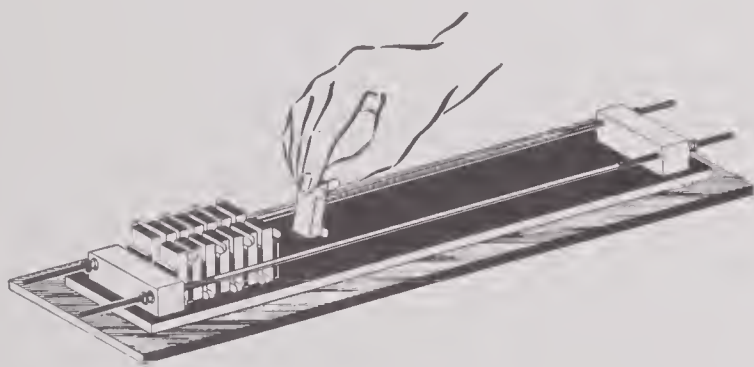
One stage in the construction of a cylindrical array. Assembling individual crystals in a jig prior to bonding them to a thin rubber mounting strip by the Cycle-Weld process. See Figure 58.
